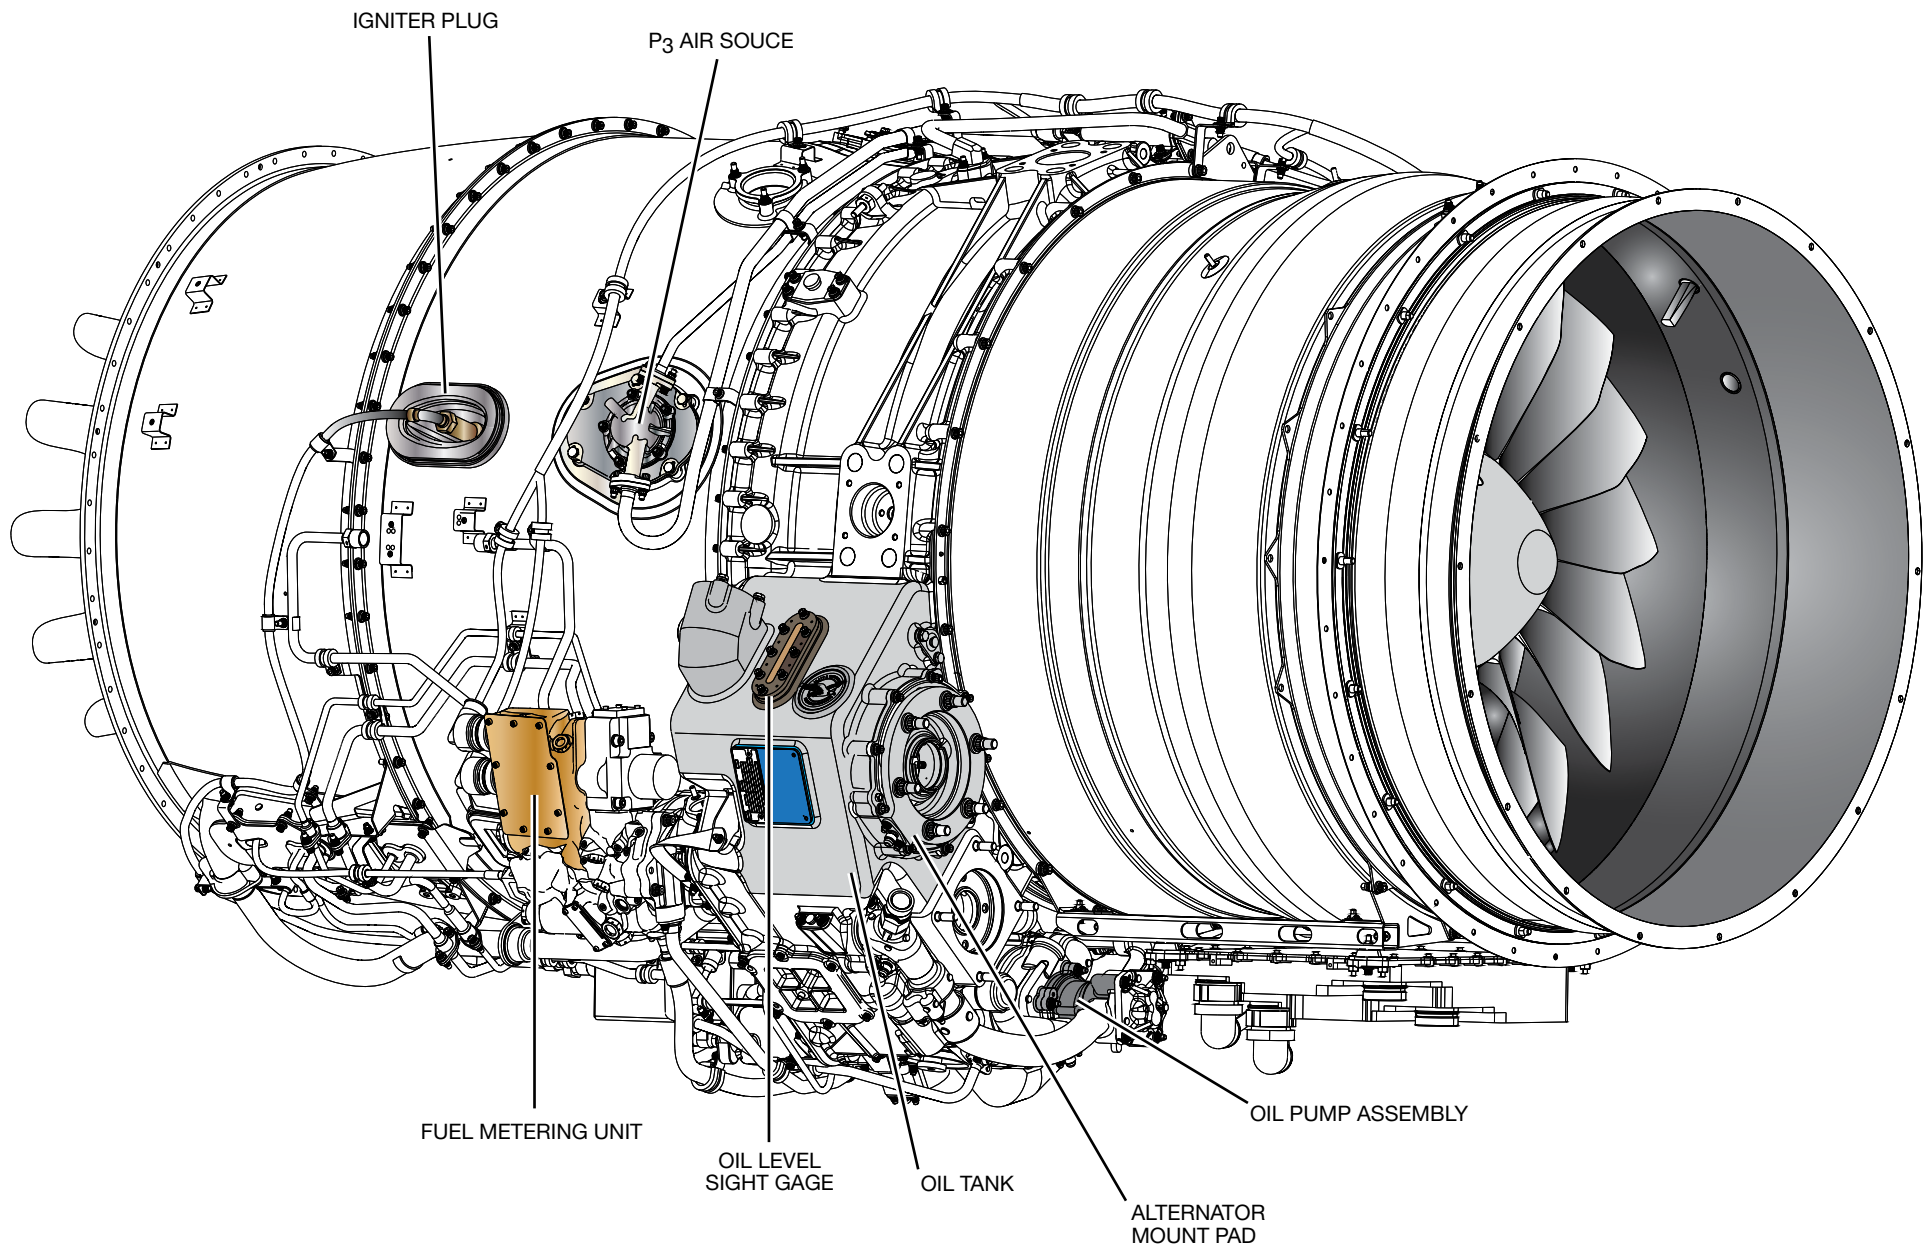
PW545C Engine (Sheet 2 of 2)
